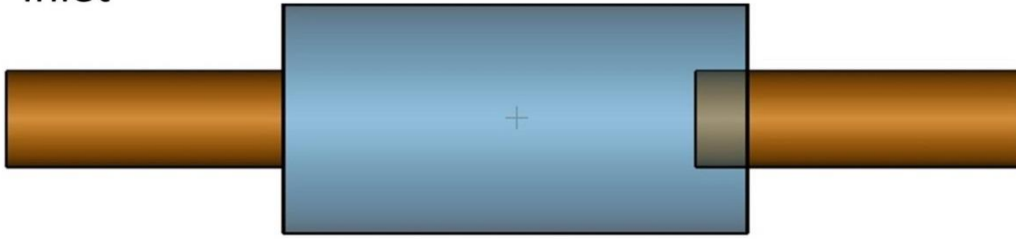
Simple Large Muffler LM9, Other Details / Dimensions as per LM2
